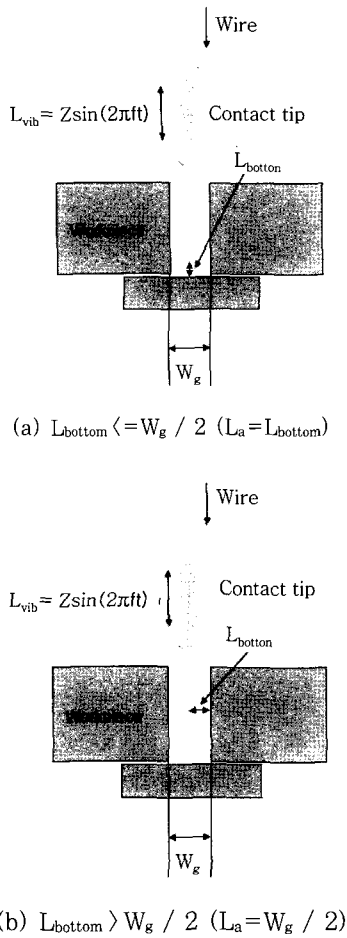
Definition of arc length in ultra narrow gap welding
